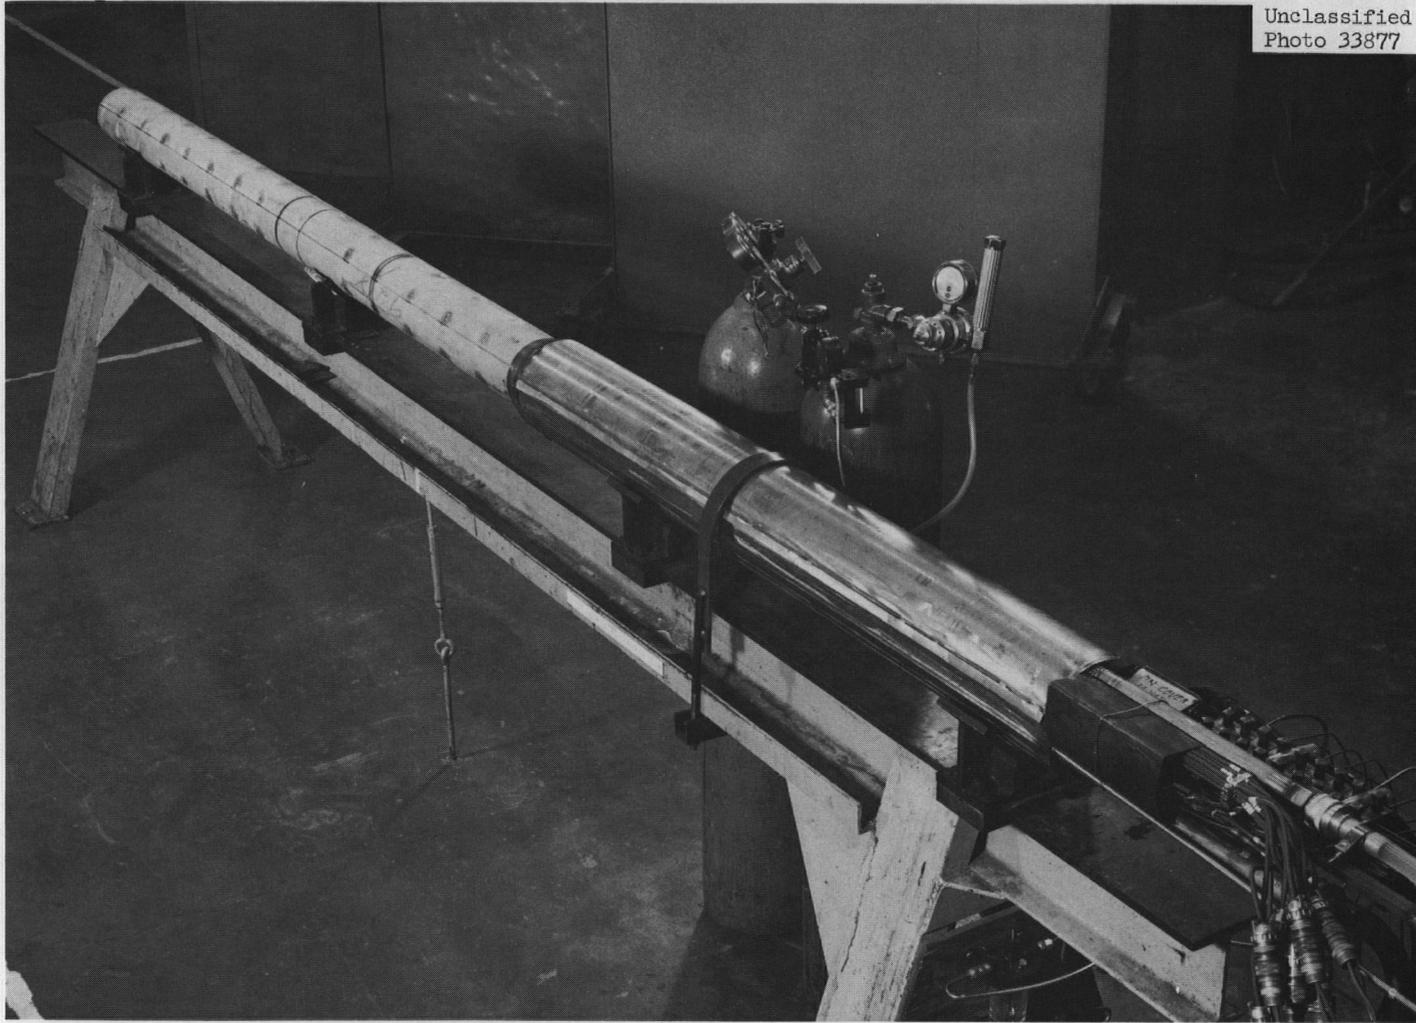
Completed Molten-Salt Loop on Assembly Fixture. The outer surface configurations of beam hole irradiation assemblies for molten-salt capsules and fueled-graphite capsules are identical except for details of coolant and instrument lines at the rear.
